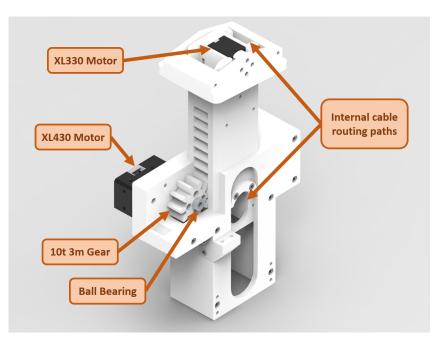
The neck subassembly with a partial section view showing the internal gear. Render made in Keyshot.
